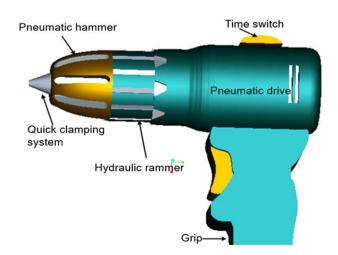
The unscrewing tools [Colour figure can be viewed at wileyonlinelibrary.com]
